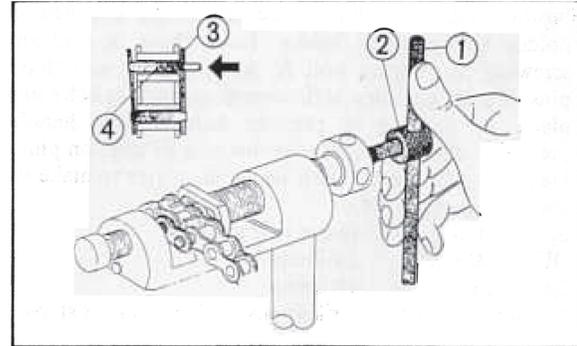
(1) Handle bar (2) Pressure bolt B (3) Joint plate (4) Joint pin
